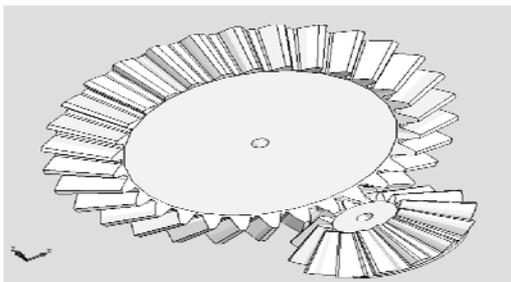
Meshing Model of the Driving and Driven Bevel Gear
